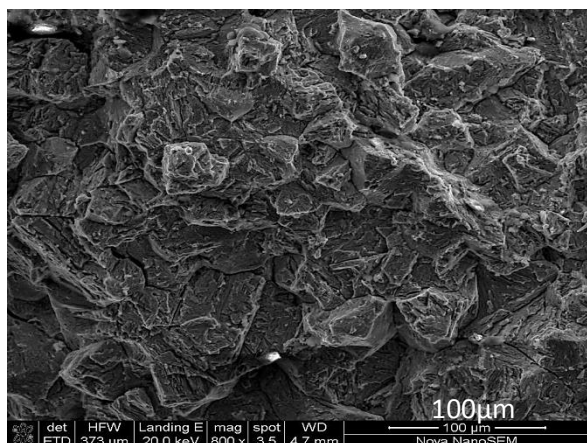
Fracture surface of 550°C temper U-bend specimen cracked in 3.5% NaCl, showing intergranular SCC and secondary cracking
